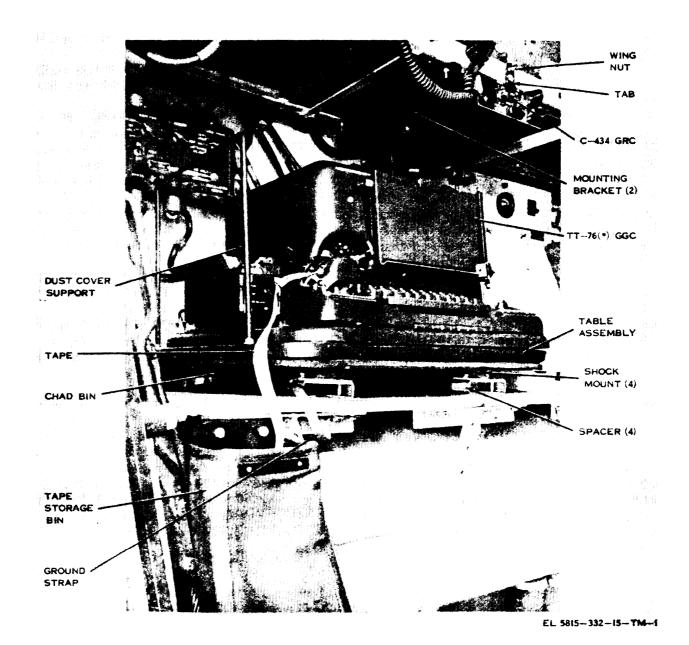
Rear roadside corner view of chad bin, and tape storage bin.
